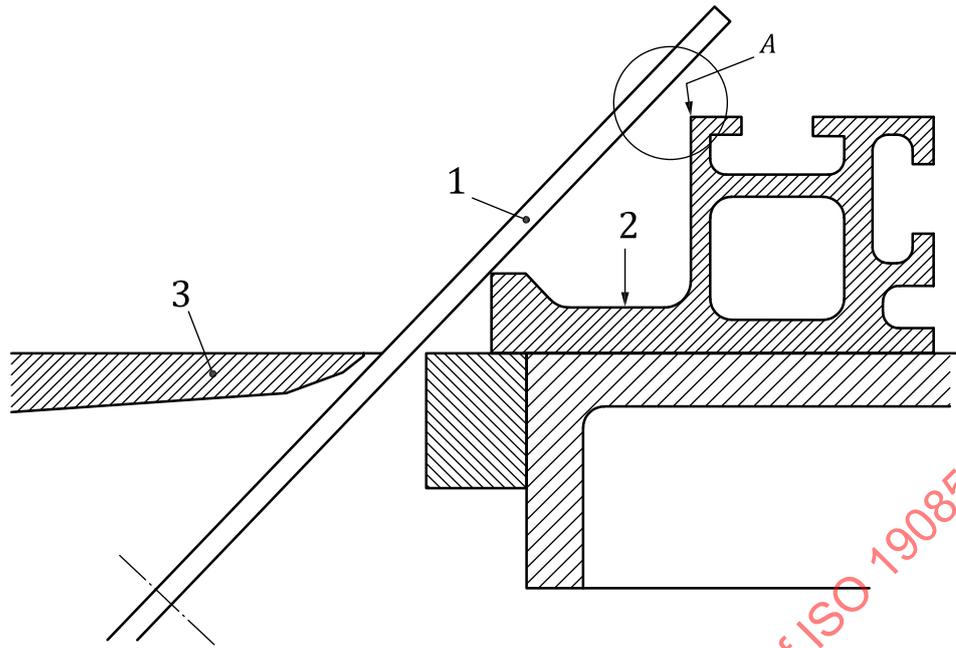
Minimum dimensions of the high and low guiding parts of the fence
